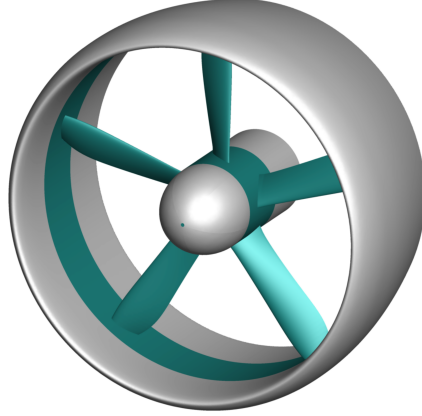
Propeller blade geometry with double ring mounting. (The rotating parts are highlighted with turquoise colour.)
